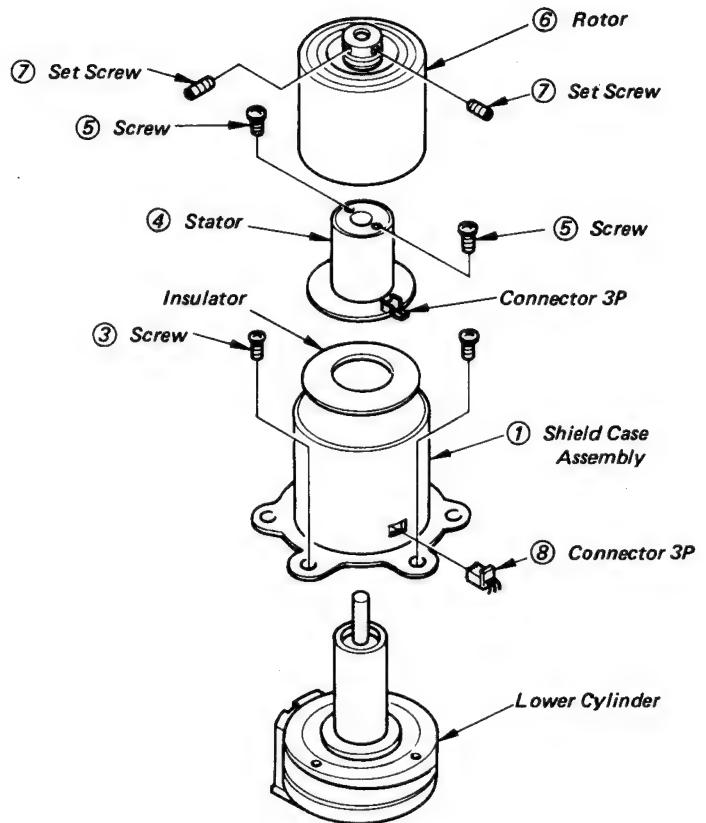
Exploded View of Cylinder Motor Assembly
